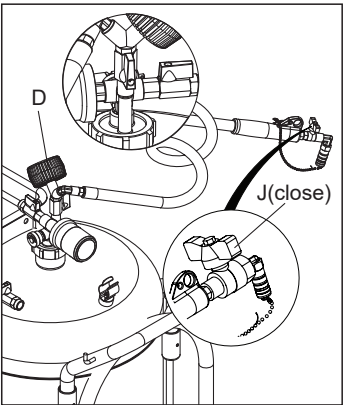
Assemble the vacuum gauge(D) and close the ball valve(J).
